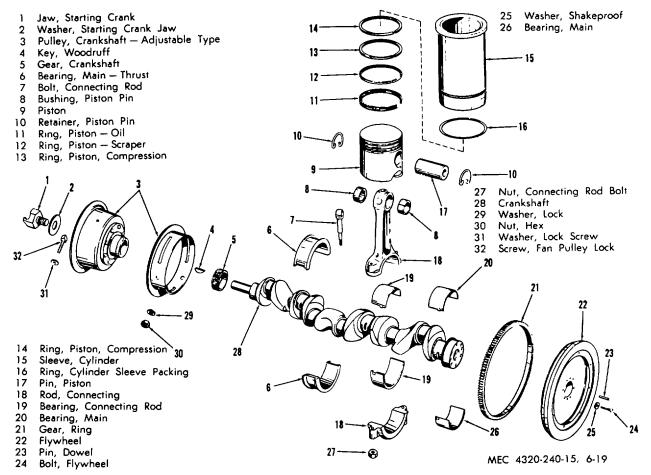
Crankshaft, pistons, connecting rods, bearings.
